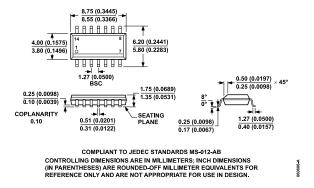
14-Lead Standard Small Outline Package [SOIC_N]
